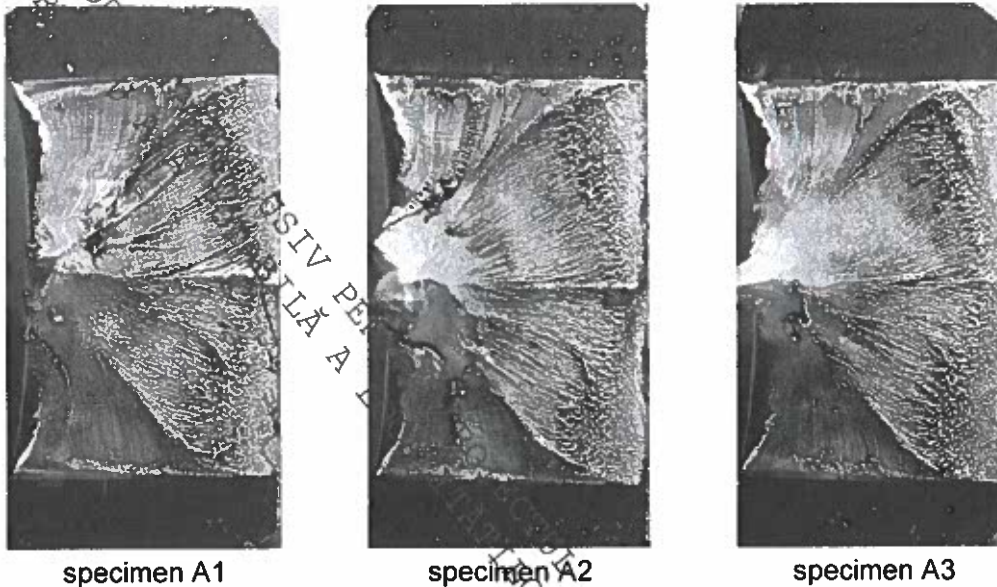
Top view of the fracture surfaces (one half of each specimen)
